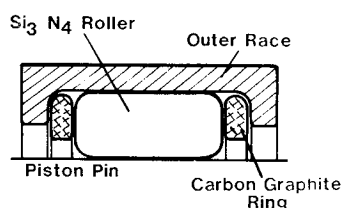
Cross section of a bearing with ceramic rollers and carbon graphite lubrication.
